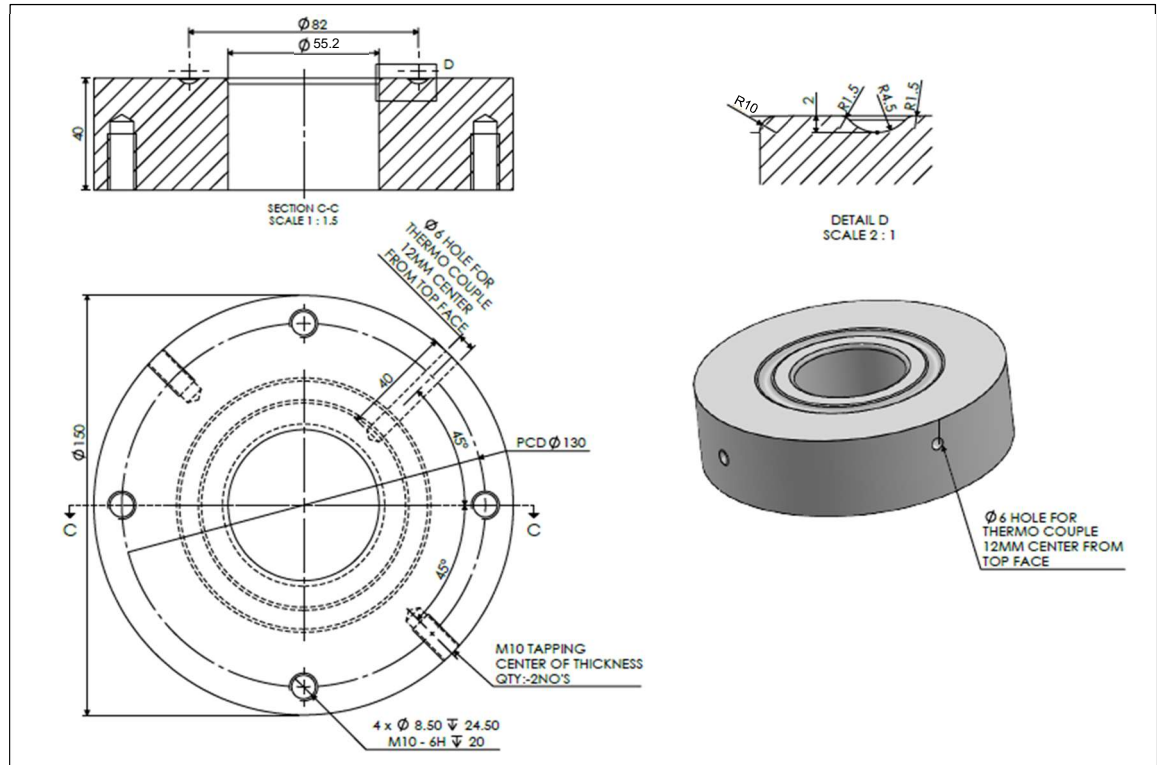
Engineering drawing of lower die with dimensions and solid model
